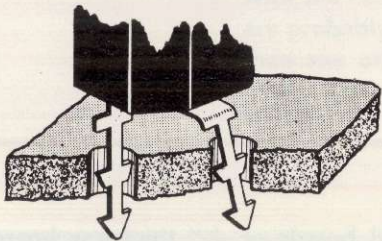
Gently push the transistor forward until it is perpendicular to the board and the projection on the centre tag has engaged the hole.
